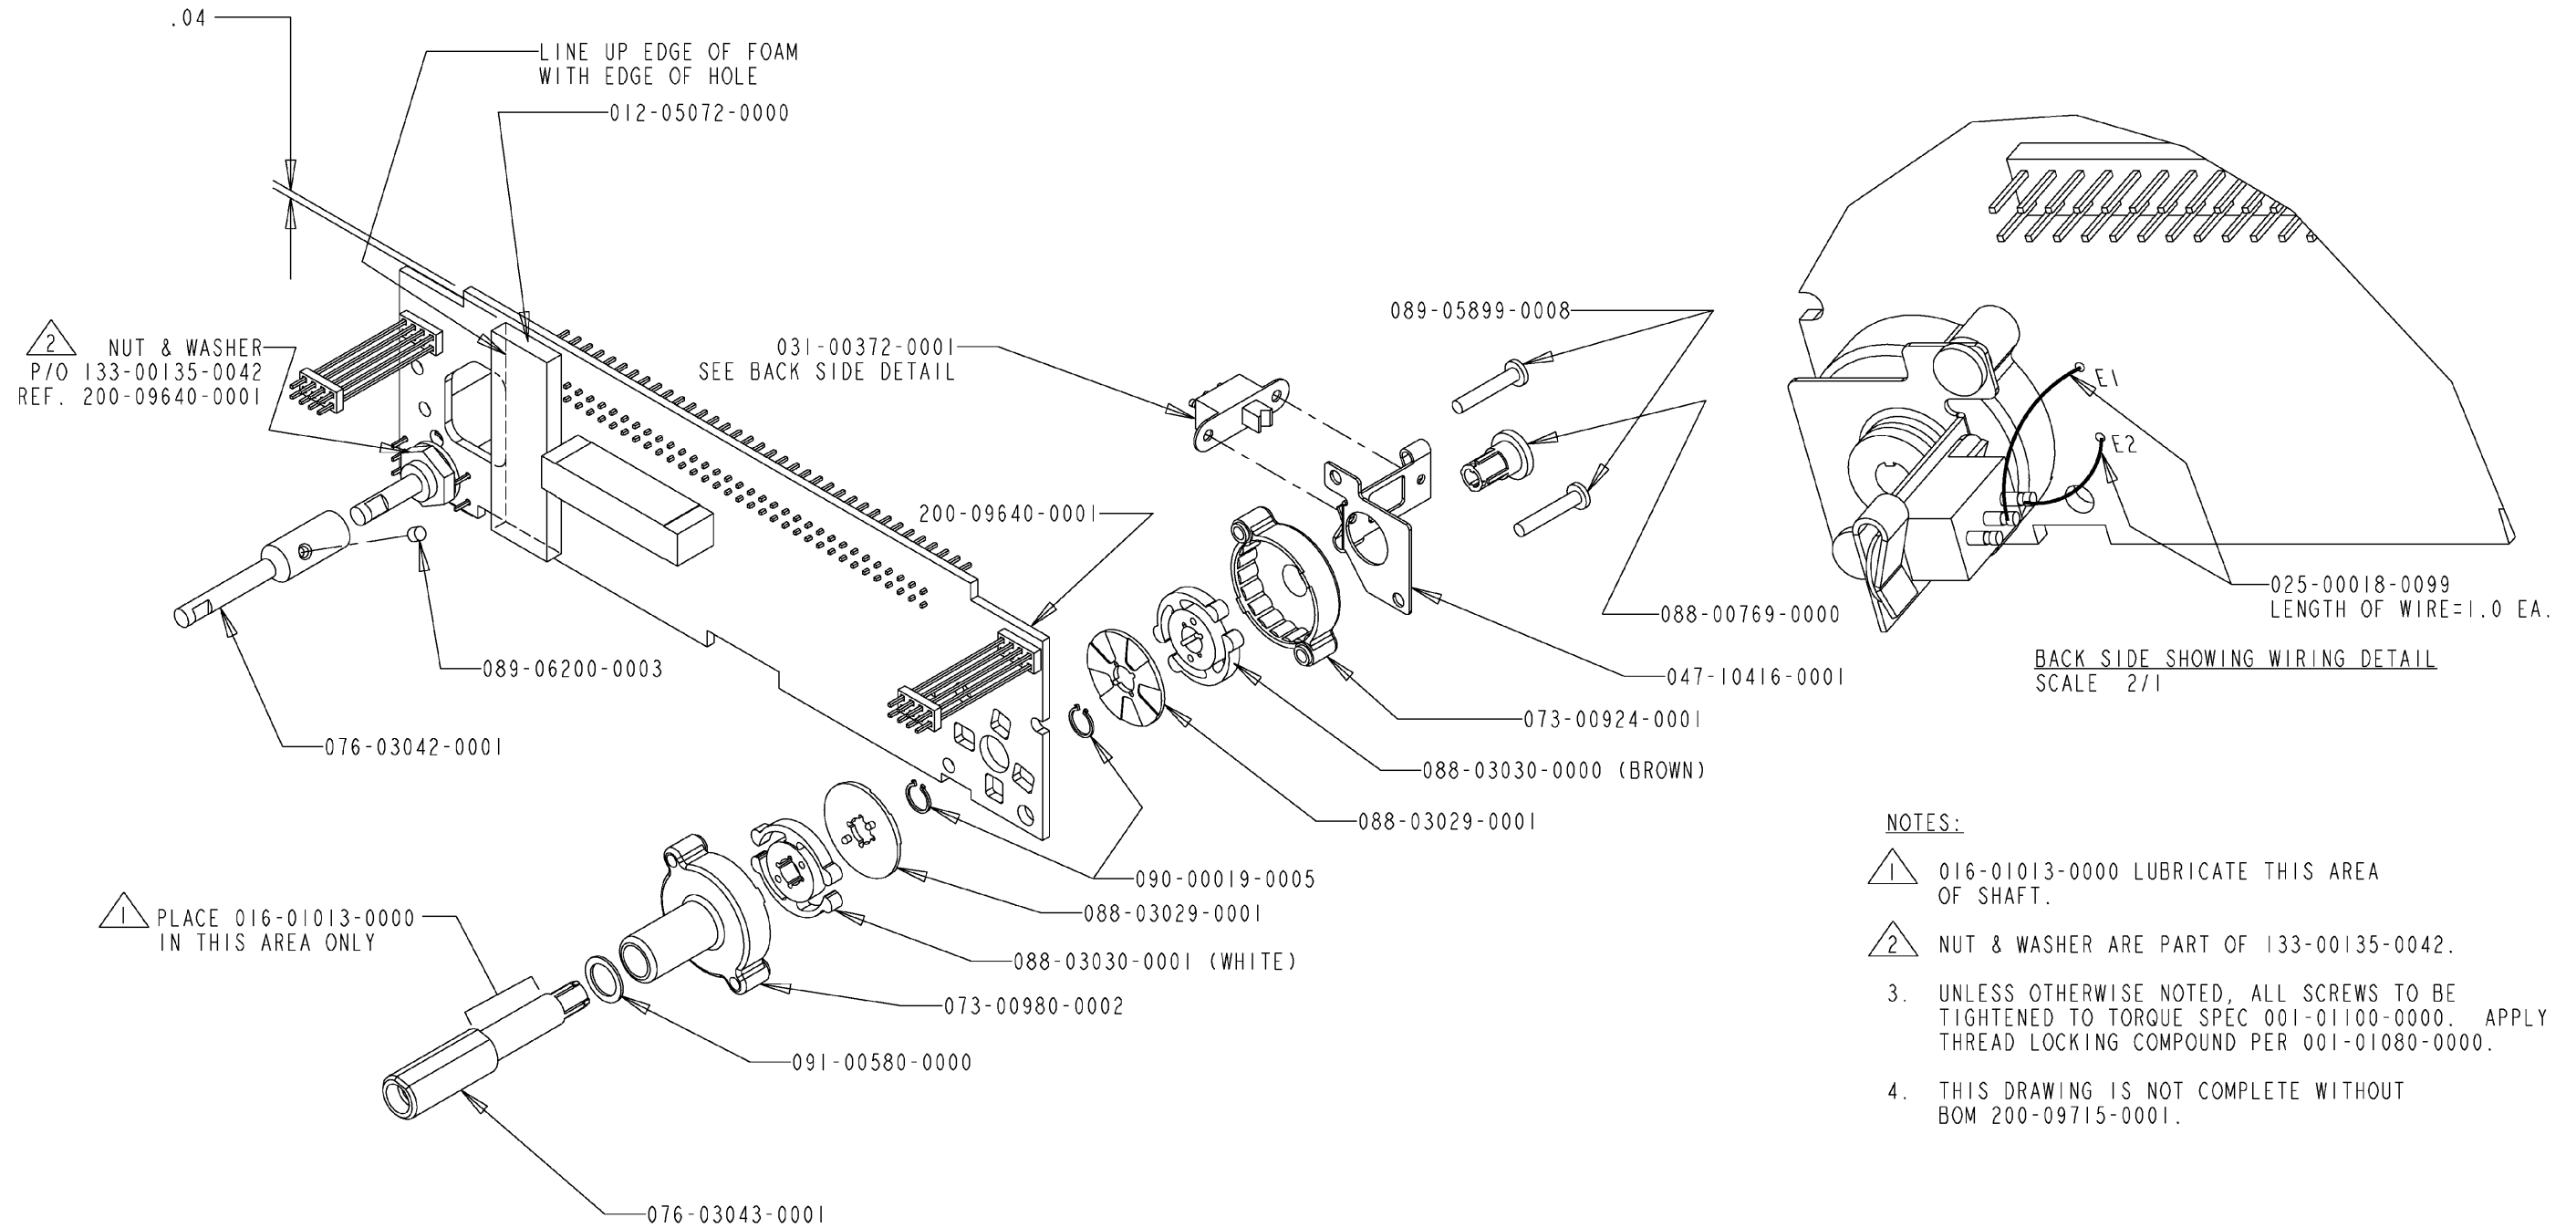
KLN 94 Front Mechanical Switch Assembly
